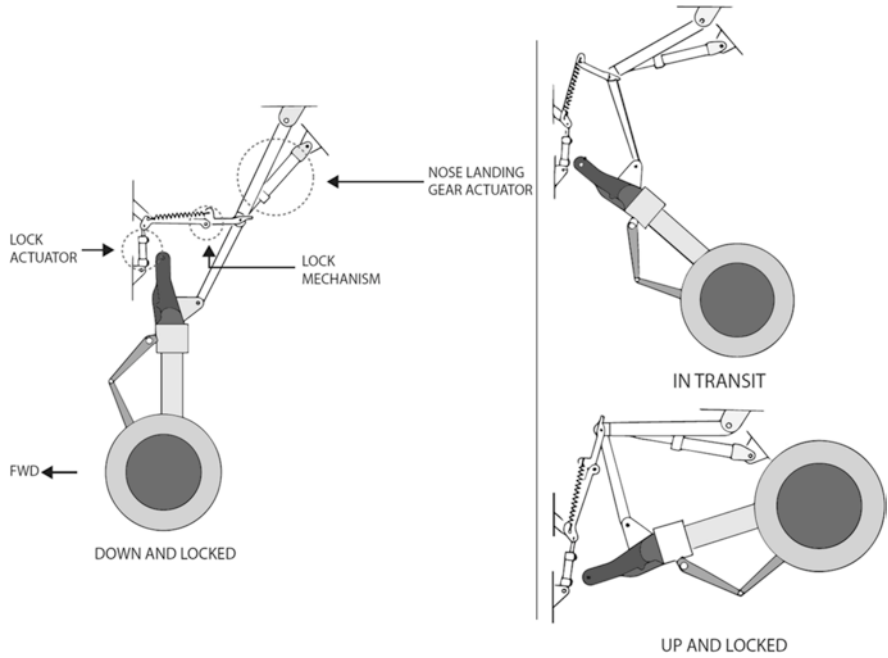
The opening and closing conditions of the Boeing 737 aircraft nose landing gear
